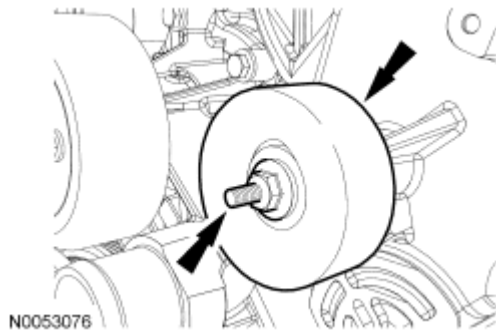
Locating Stud Bolt & Accessory Drive Belt Idler Pulley
